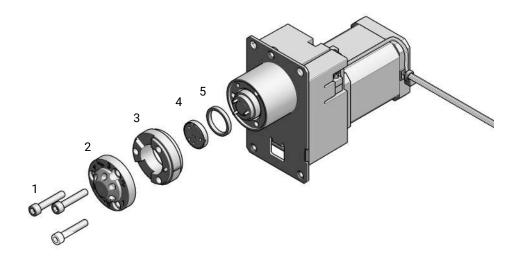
2 Position/6 Port Injection Valve 1300 bar
